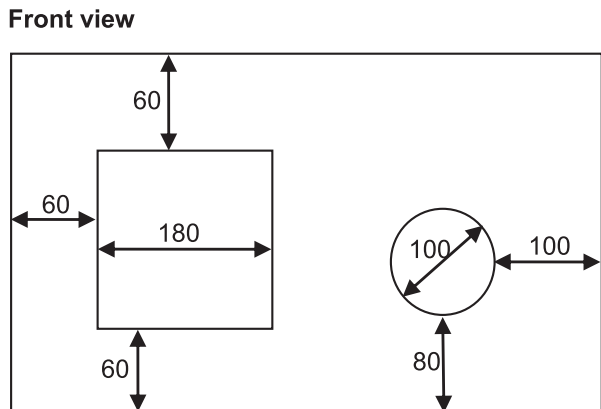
Generic front plate with two large apertures. All dimensions are in millimeters.
